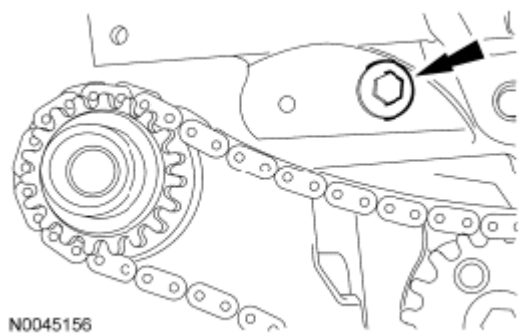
Locating Oil Pump Drive Chain Tensioner Shoulder Bolt
